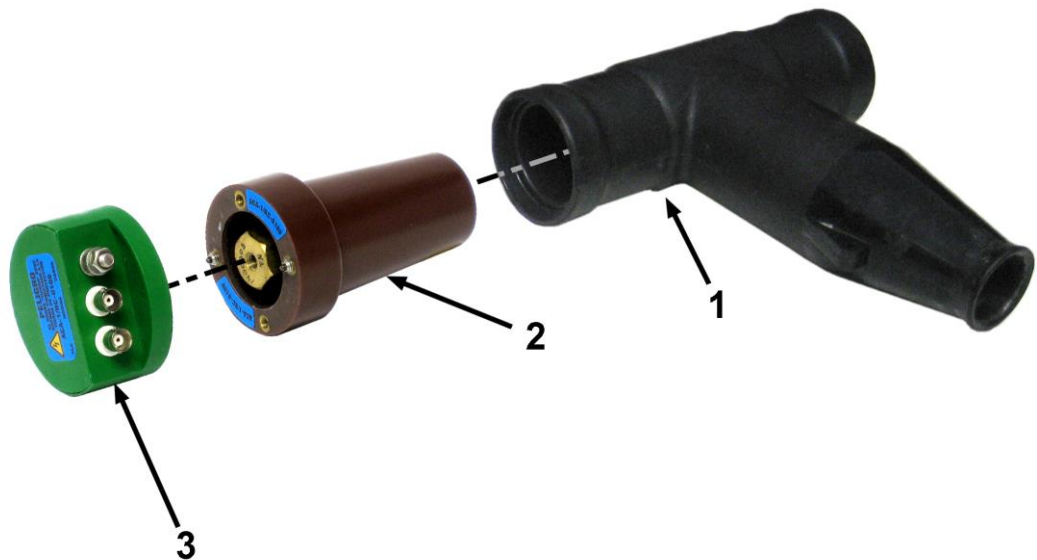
Instructions to assemble the ACA-RC (2) and APMR-1/RC (3) blocks
